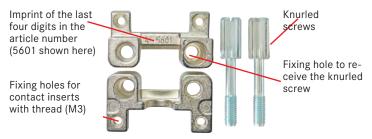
Screw adapter with fixing screw (upper part)
